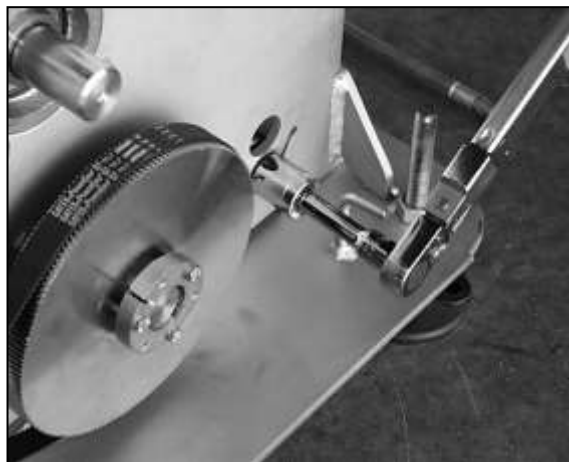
Tightening the Drive Arm Pivot Bolt
